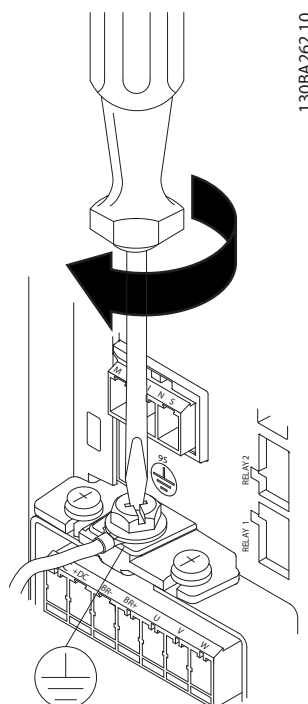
When mounting cables, first mount and tighten earth cable
